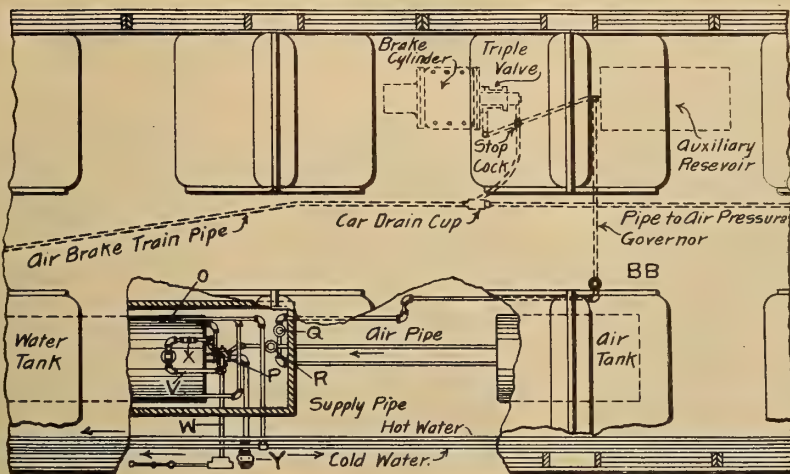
PART SECTIONAL PLAN SHOWING PIPING AND CONNECTIONS BETWEEN AIR TANK AND WATER TANK.
